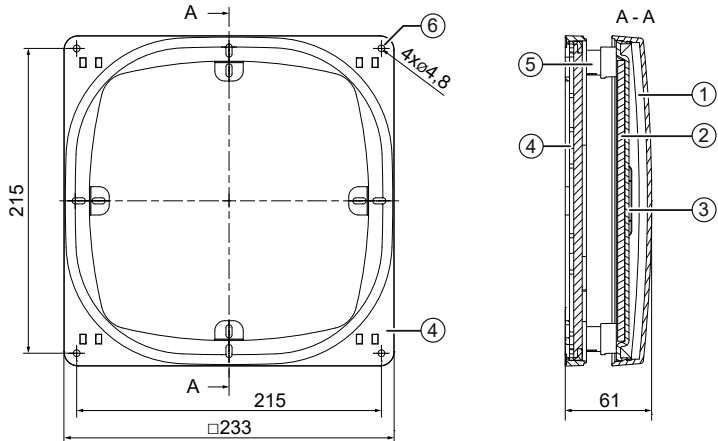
Dimensioned drawing of Flair inner cover V-233x233
